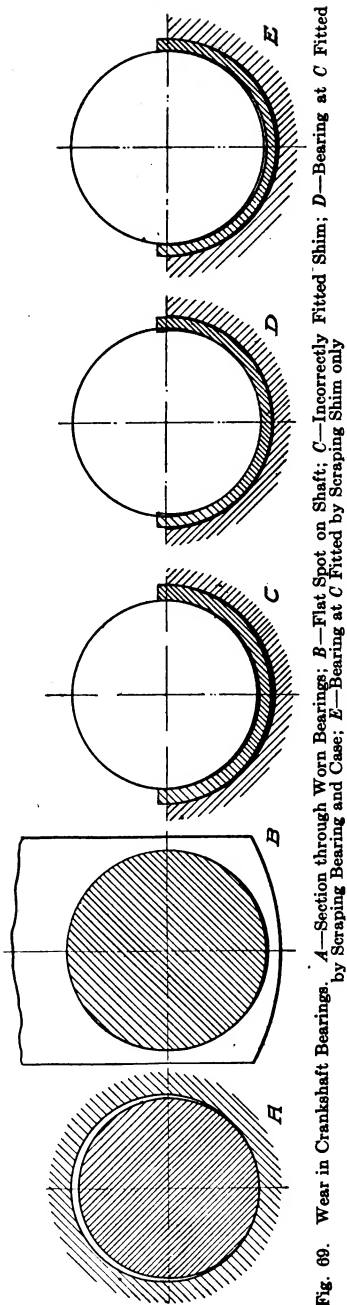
Wear in Crankshaft Bearings. *A*—Section through Worn Bearings; *B*—Flat Spot on Shaft; *C*—Incorrectly Fitted Shim; *D*—Bearing at *C* Fitted by Scraping Bearing and Case; *E*—Bearing at *C* Fitted by Scraping Shim only
